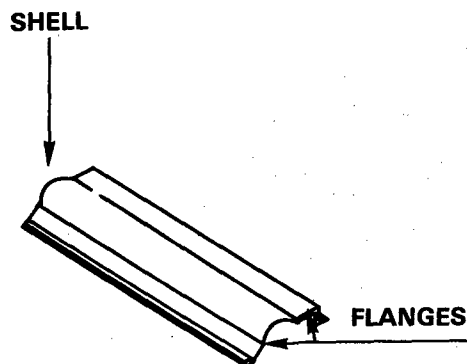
Mark 6 hoist tube, shell-to-flange butt weld
